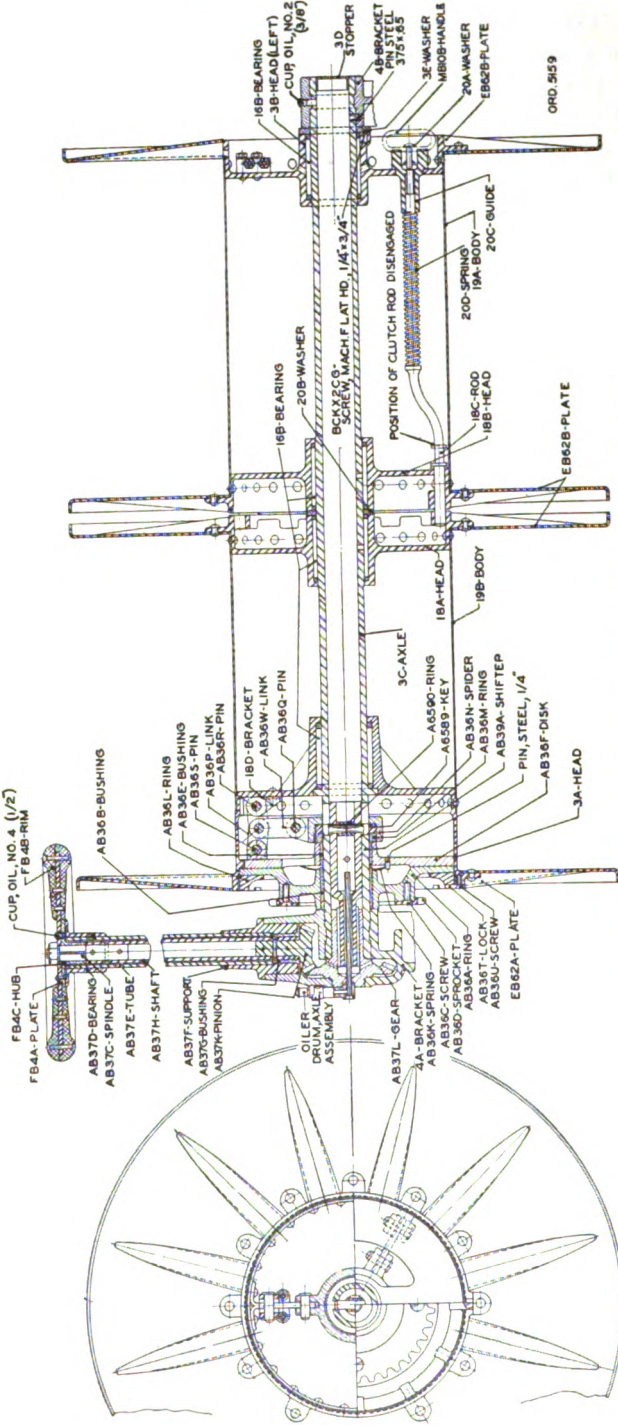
Artillery reel, M1909MI, sections through drums and clutch
